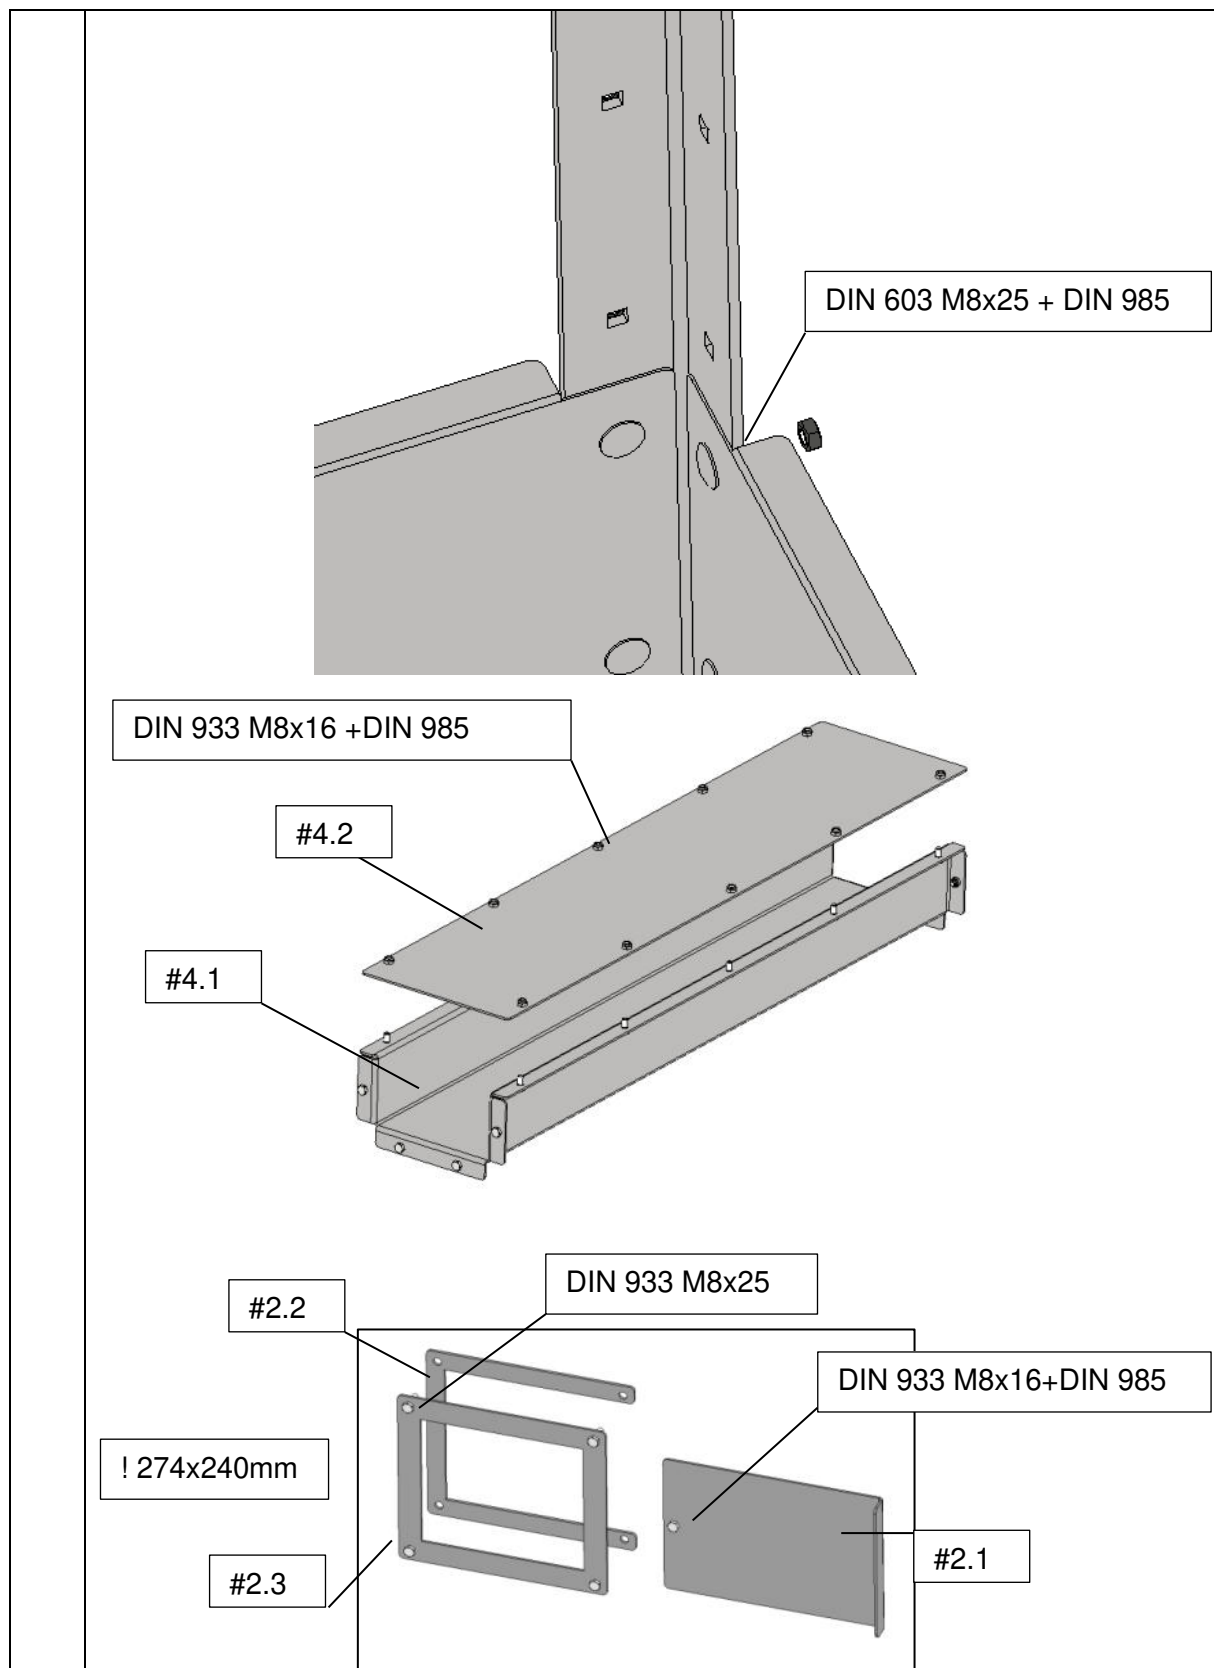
Exploded view of air box 2.3m³ (not all parts numbered)
